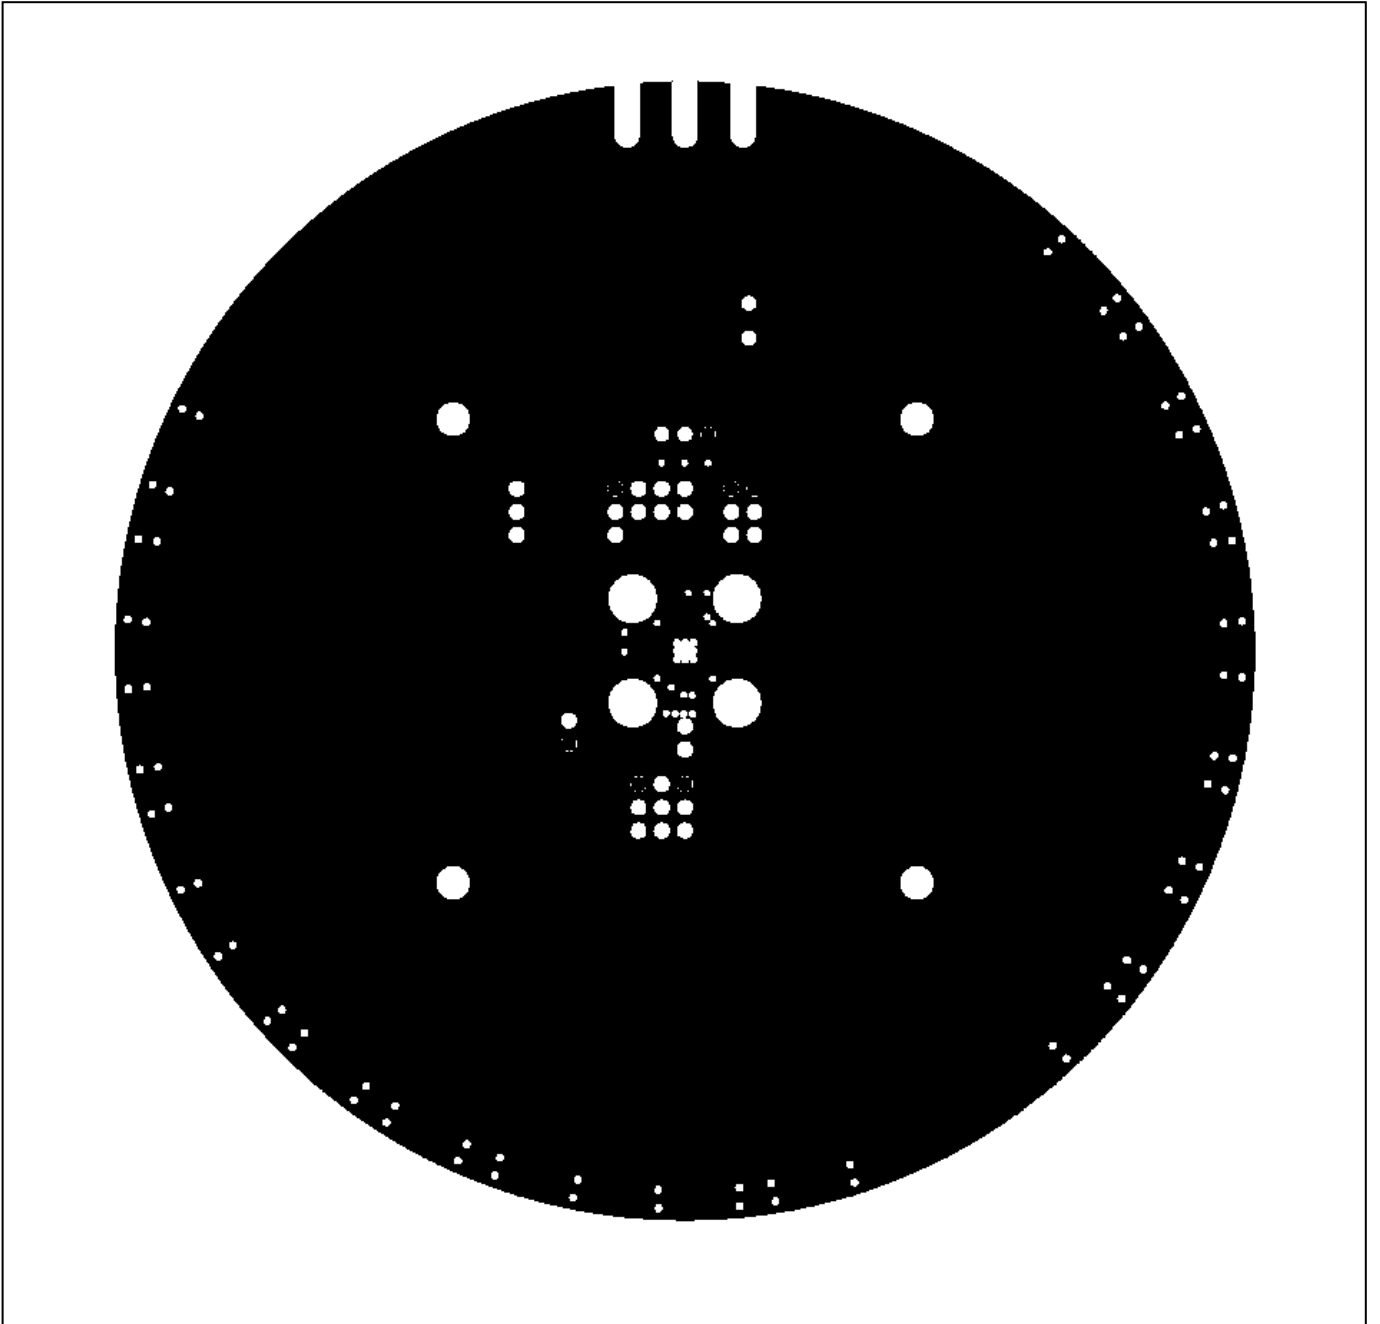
MAX3882 EV Kit PC Board Layout—Power Plane
